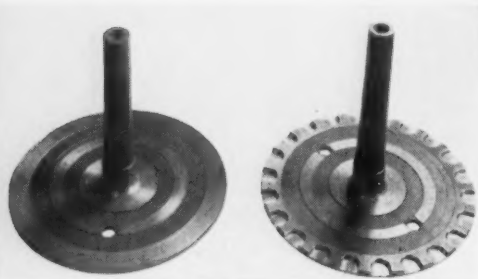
A thin section metal part: a total of 22 slots is end milled in the flange.
